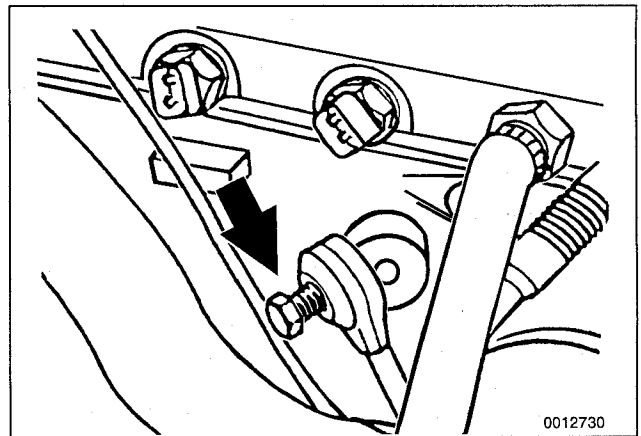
Knock sensor mounting bolt on front left side of cylinder block.
